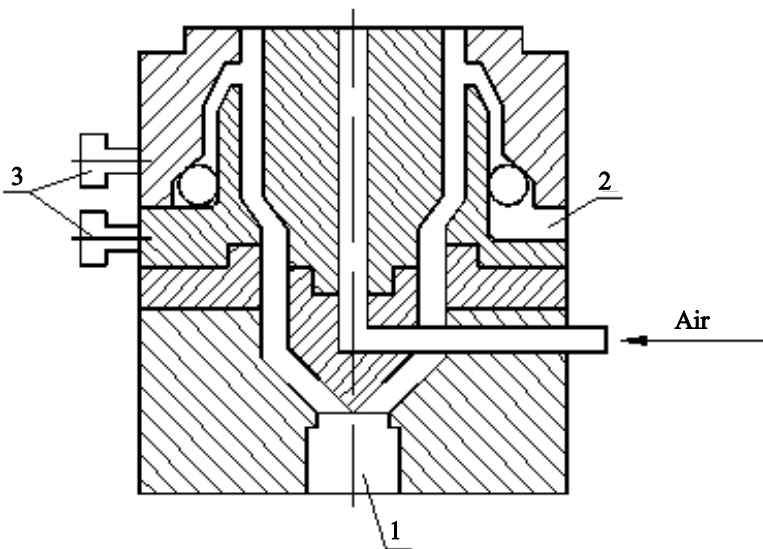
Co extrusion head for dual layer films: 1 – entrance for the melt forming the inner layer; 2 – entrance for the melt forming the outer layer; 3 – adjusting bolts [own study]
